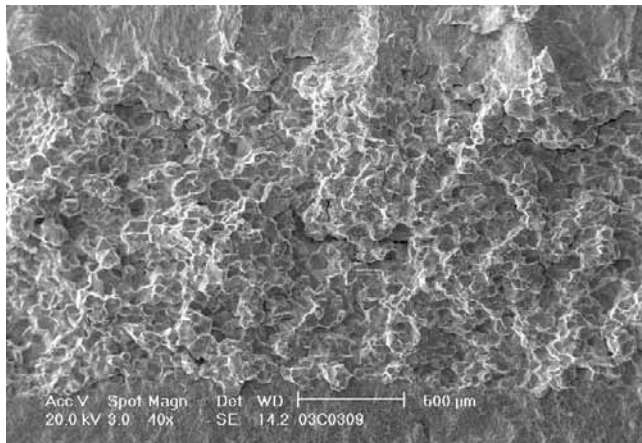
Fracture surface of 10 mm sensitized AISI 304 steel SEN(B) specimen No. 4. The fracture morphology is intergranular. The pre-fatigue crack tip is in the bottom and the final post-test fatigue crack is in the top of the photograph. Applied displacement rates: 5×10^{-8} mm/s in the beginning and 0 mm/s in the end of the test. Simulated BWR water, $T = 290^\circ\text{C}$, conductivity (outlet) = $0.25 \mu\text{S}/\text{cm}$, dissolved O_2 (outlet) = 500 ppb, $\text{ECP} = 120 \text{ mV}_{\text{SHE}}$.
